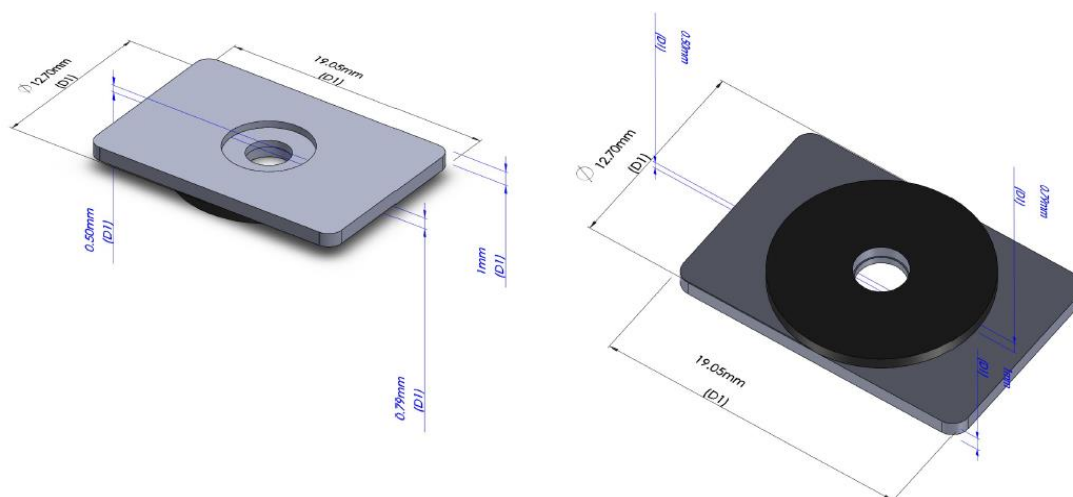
A three dimensional model of the metal crosspiece used to integrate the low profile implants with the TRIO system, with top and bottom views. The bottom of the crosspiece (left) included a small indentation that helped keep the implant from slipping along the surface. The top (right) included a small magnet, represented by the dark disc, to attract the implant.
